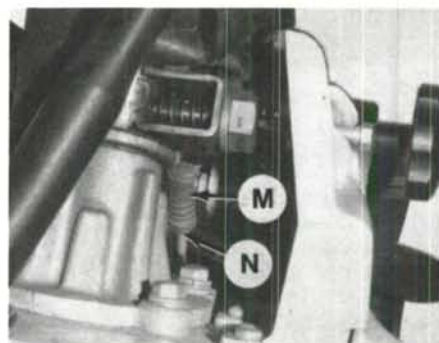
On JF650 models, loosen locknut (N) and remove joint (M) from ball joint on lever and rotate joint (M) up or down on threaded end of trim cable as needed to correctly position steering nozzle (N—Fig. JS3-46) as outlined in text.
